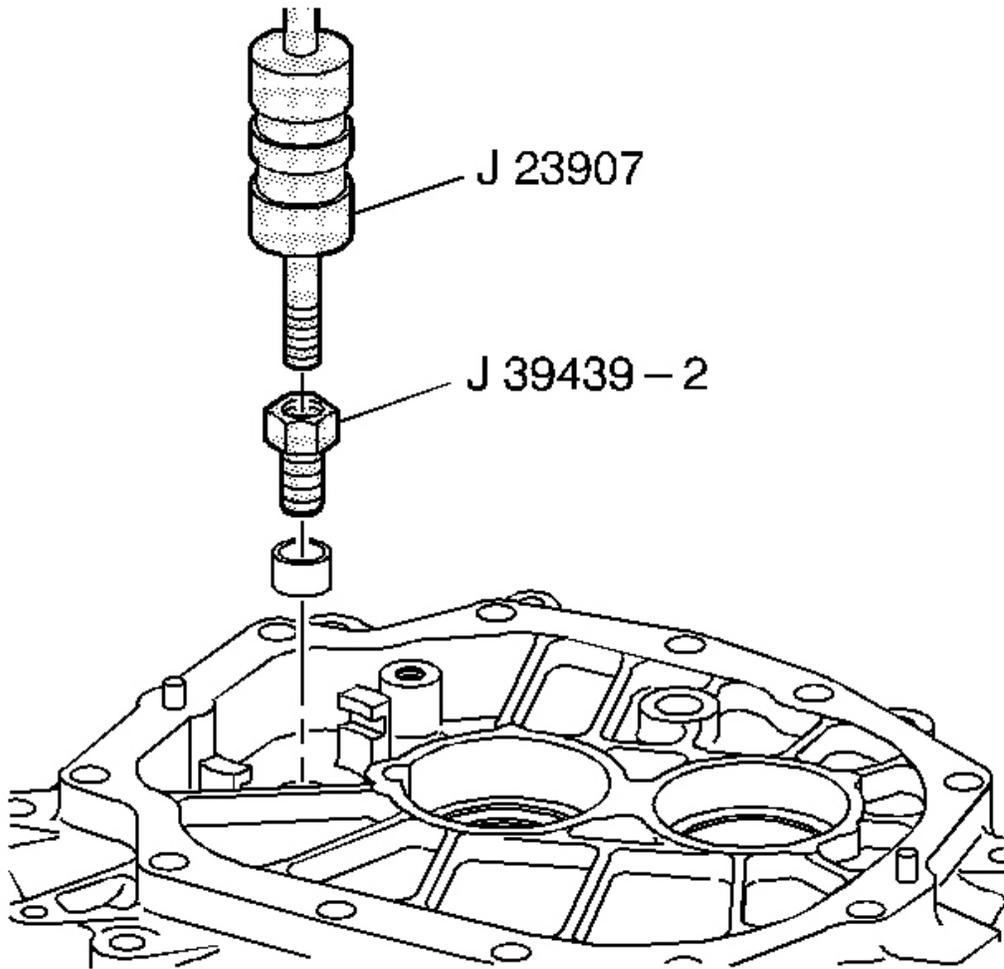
Removing 1st/2nd & 3rd/4th Shift Shaft Bushing
